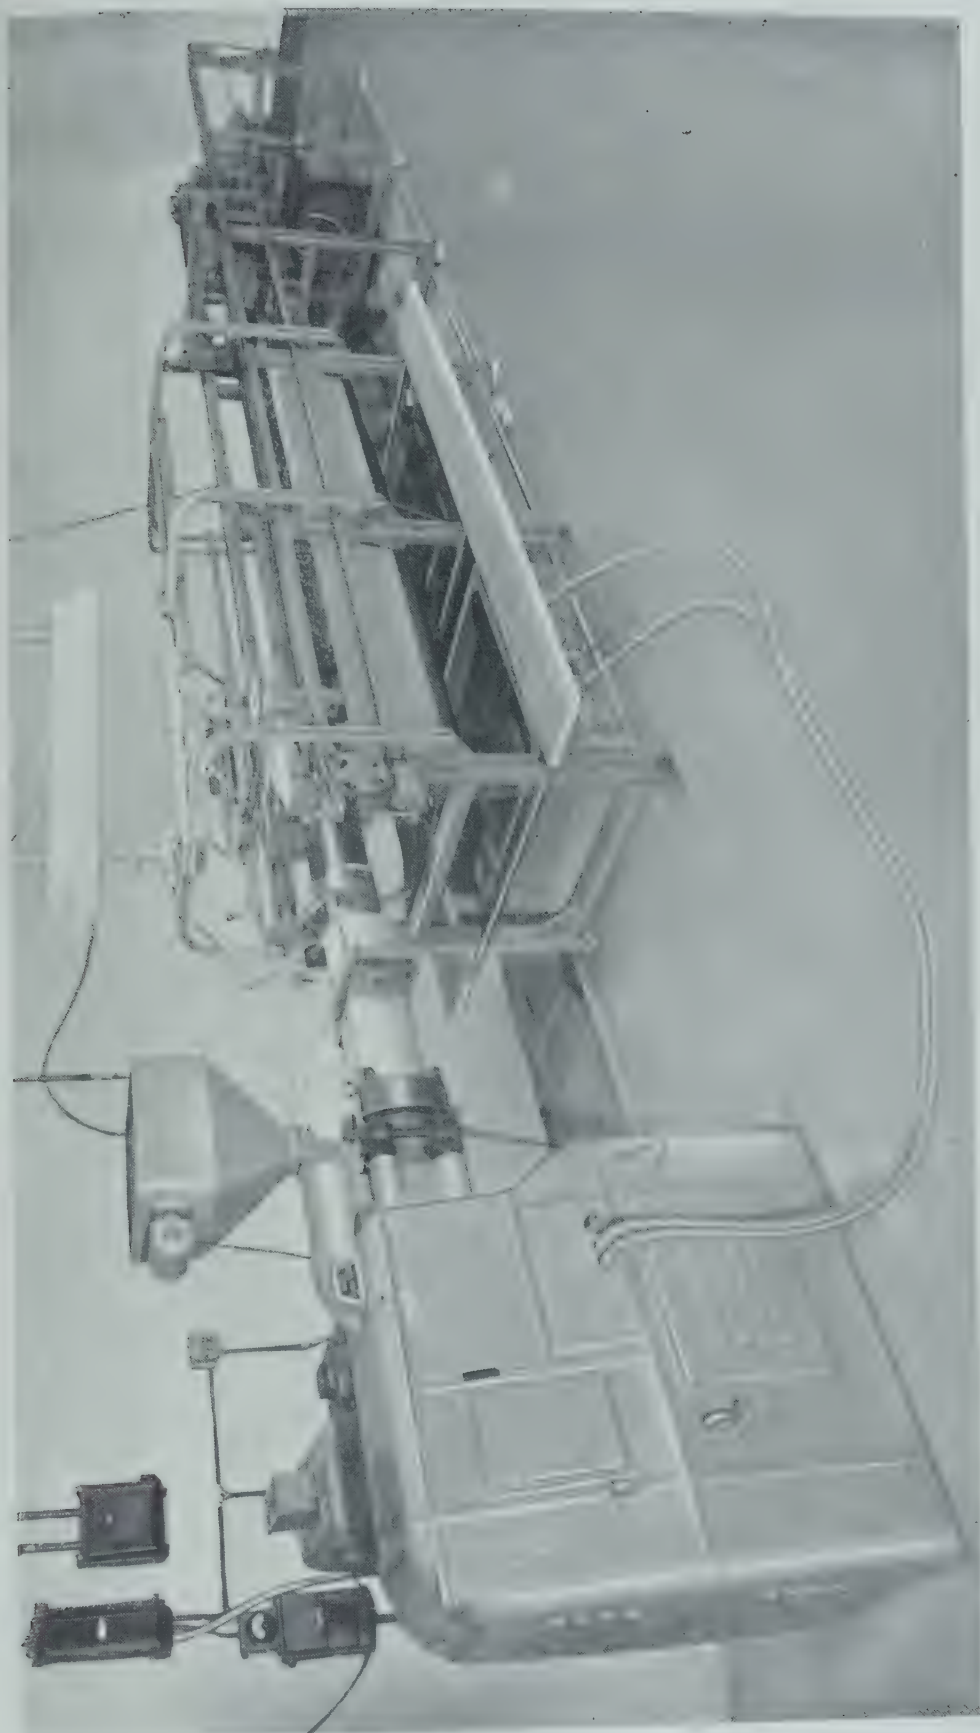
Twin screw extruder (R.G.100) and take-off equipment producing $6\frac{1}{2}$ in. o.d. \times $5\frac{3}{4}$ in. i.d. polythene tubing R. H. Windsor, Ltd.)
